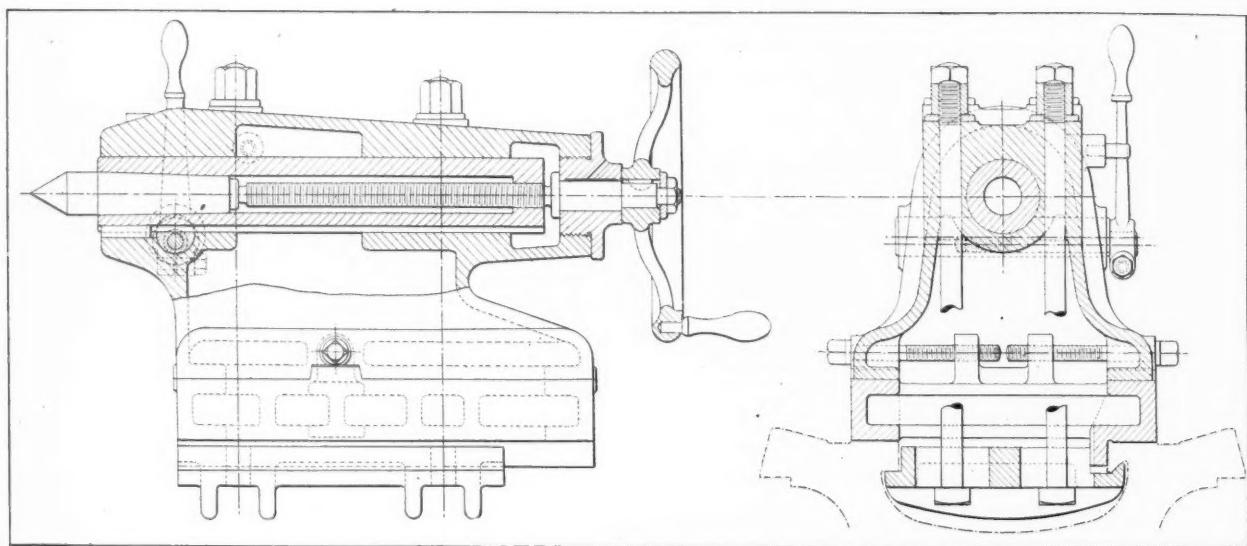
Rigidly Constructed Tailstock with Special Clamping Device
